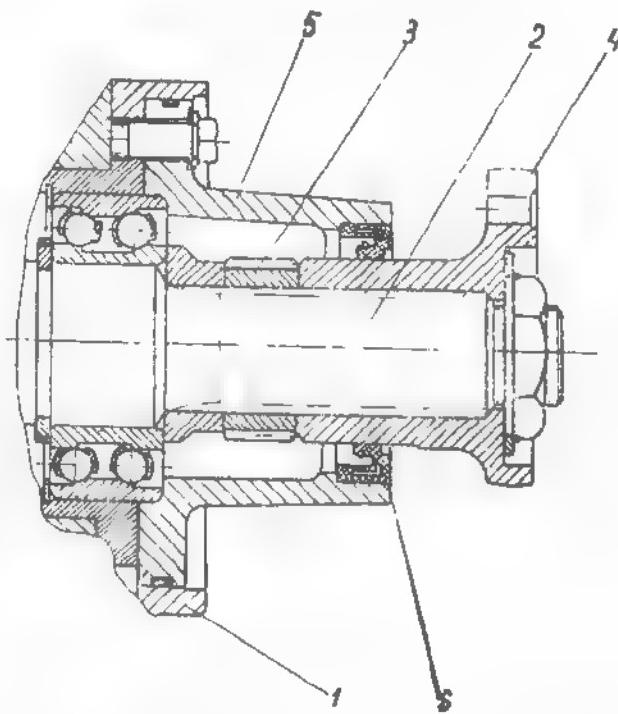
GEARBOX OUTLET FOR VEHICLES WITH SINGLE DRIVE AXLE (4 x 2)
